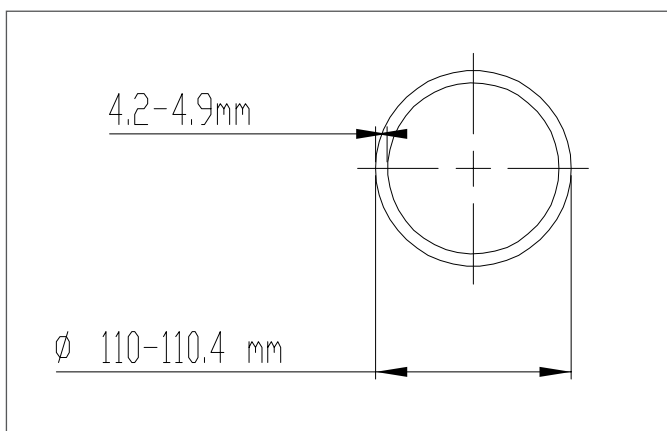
RAUVENT spigot end (Vertical inlet / outlet) cross-sectional dimensions
